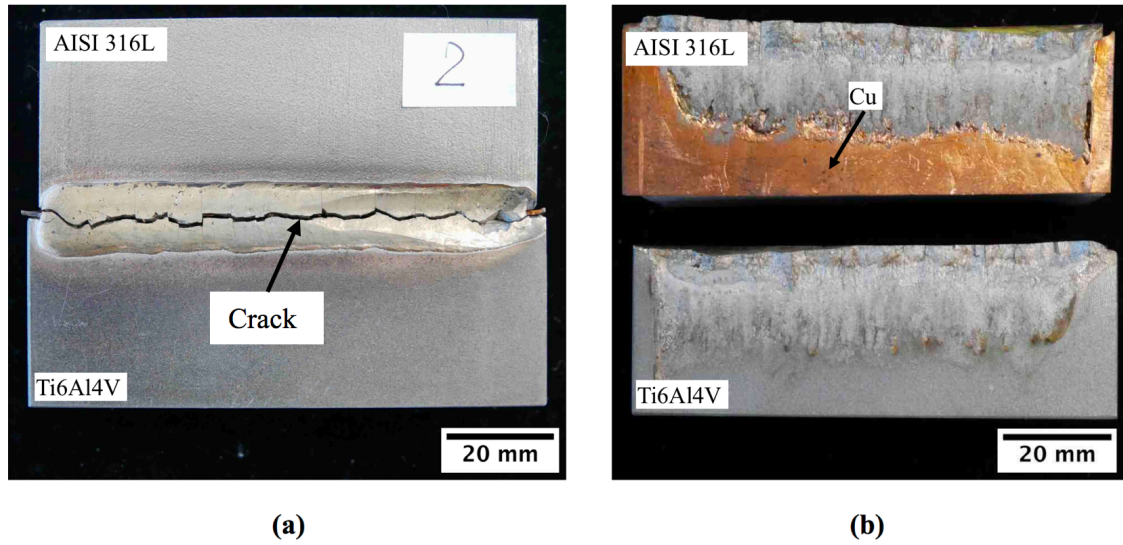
Dissimilar weld 2 (a) weld top surface (b) joint contact surface with the copper sheet welded to stainless steel side.
